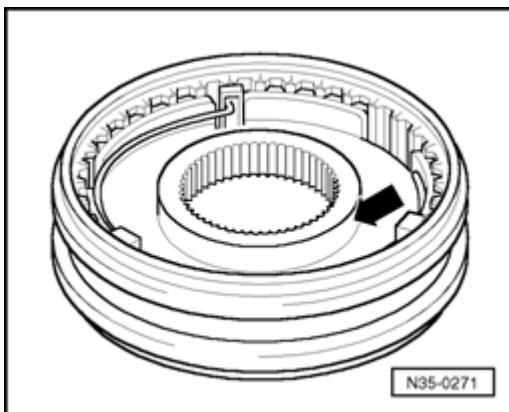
Installation position 3rd and 4th gear locking collar/synchro-hub
